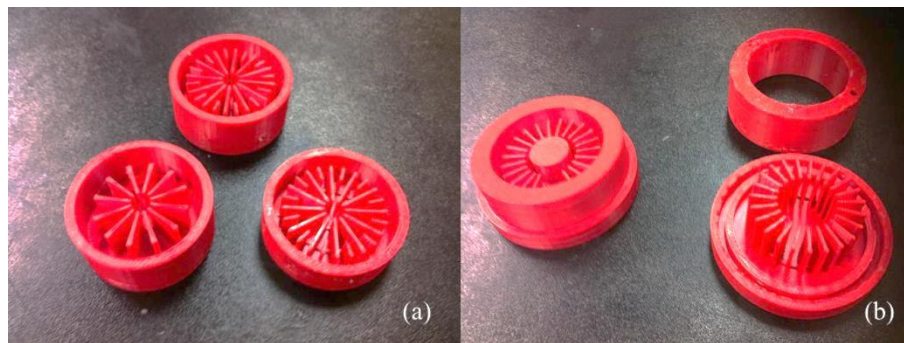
Molds for Capture Mechanism V2, (a) Mold V2a; (b) Mold V2b
